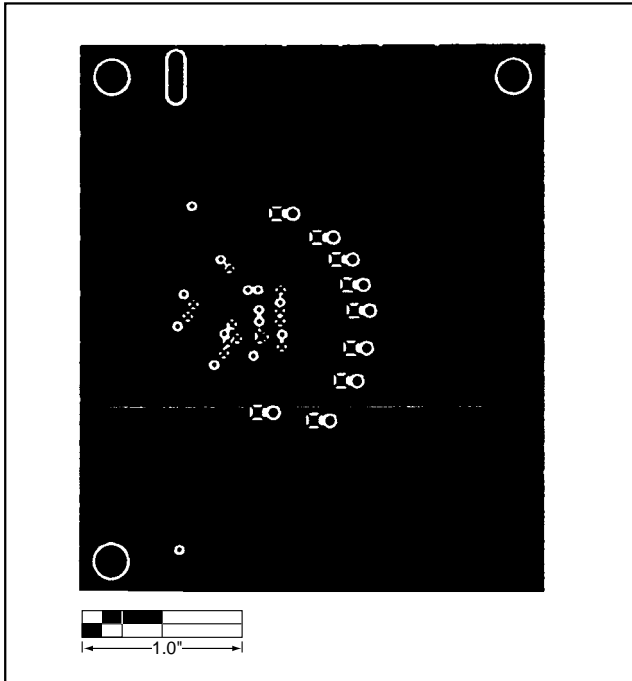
MAX3680 EV Kit PC Board Layout—GND Plane
